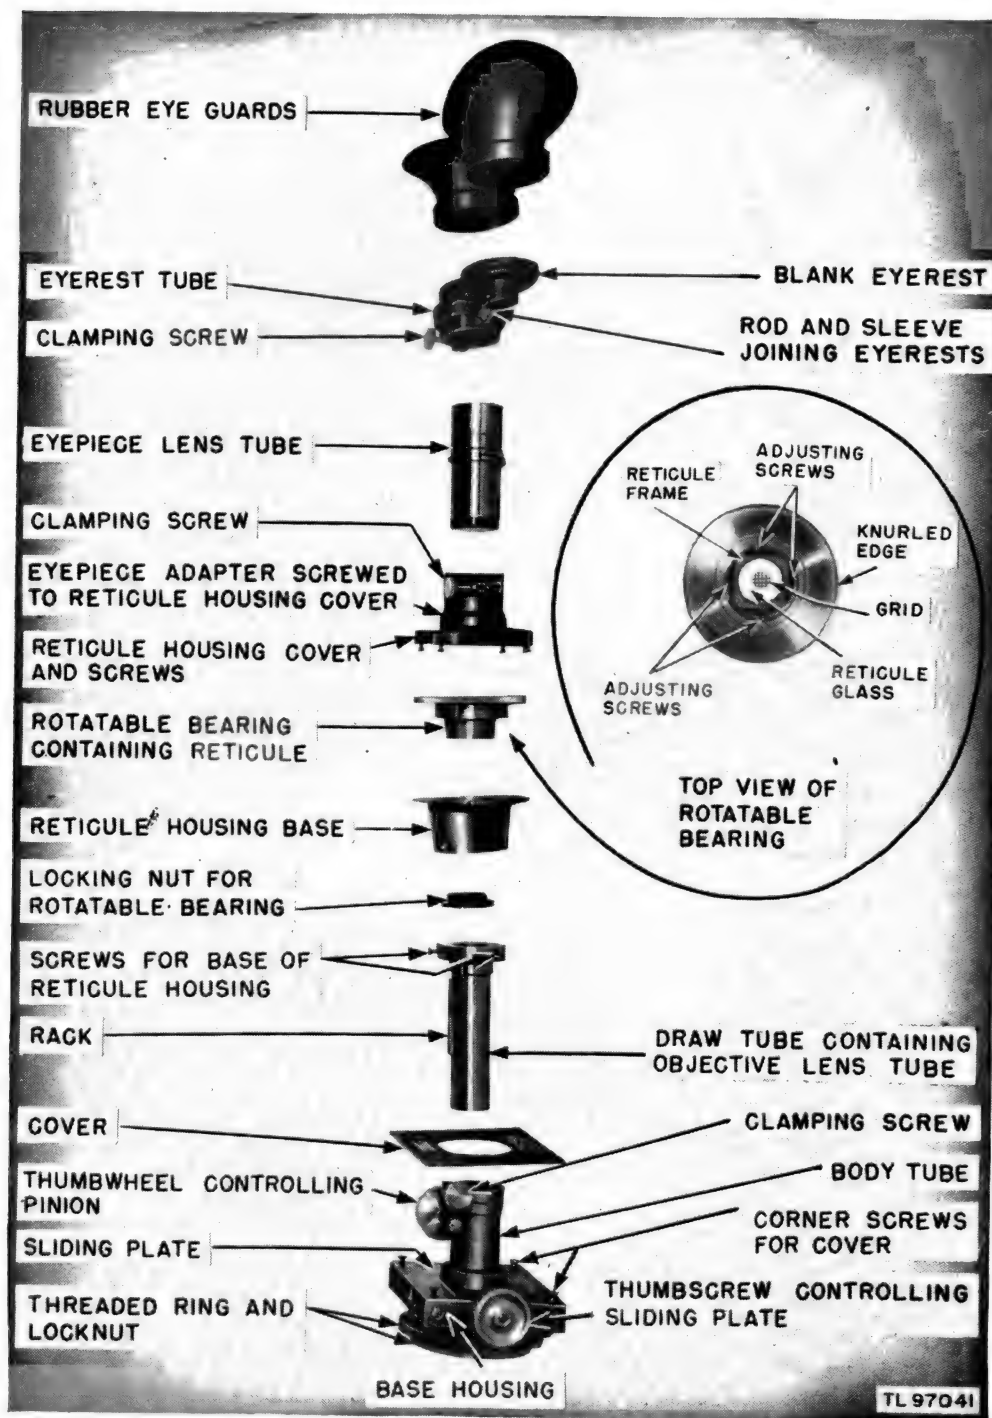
Viewing Attachment PH-98-(*), exploded view of construction.
